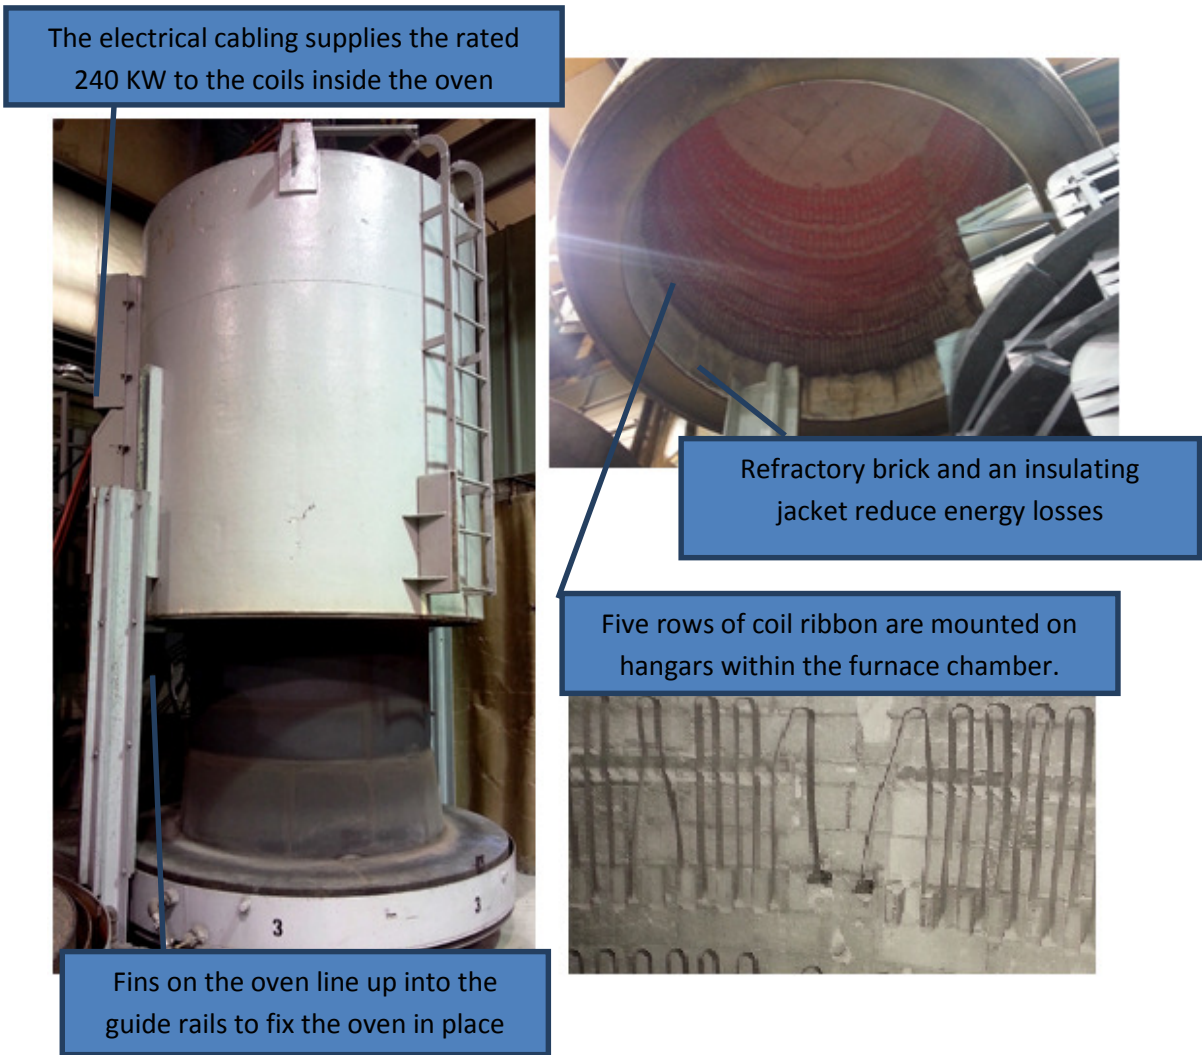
Furnace, retort, and element coil details [13]. Courtesy of Carte International Inc.
